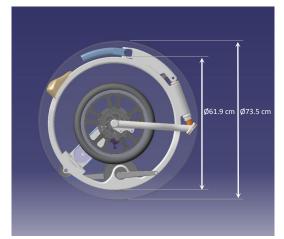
D folded version with dimension of outside frame diameter and packaging diameter.
